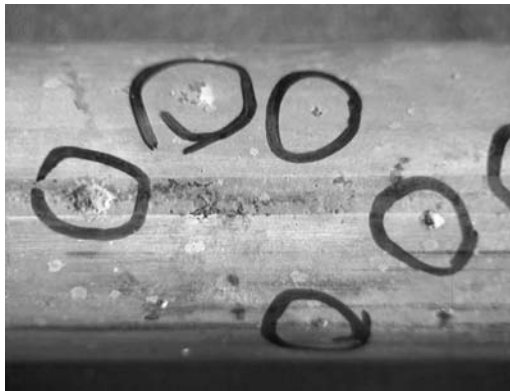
Pitting corrosion on a stainless steel tube surface.
